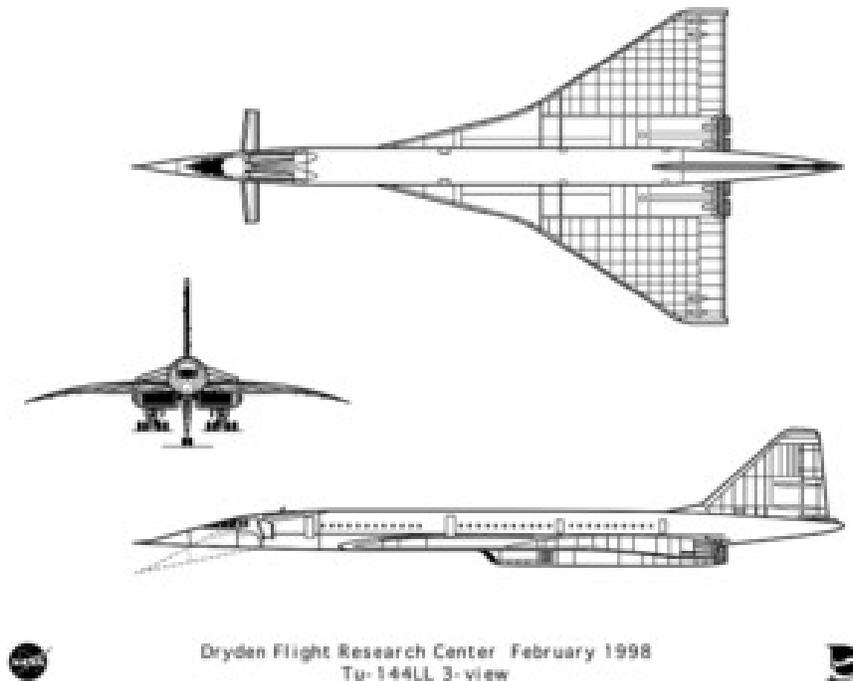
Top view, front view and side view of the Tupolev Tu-144
